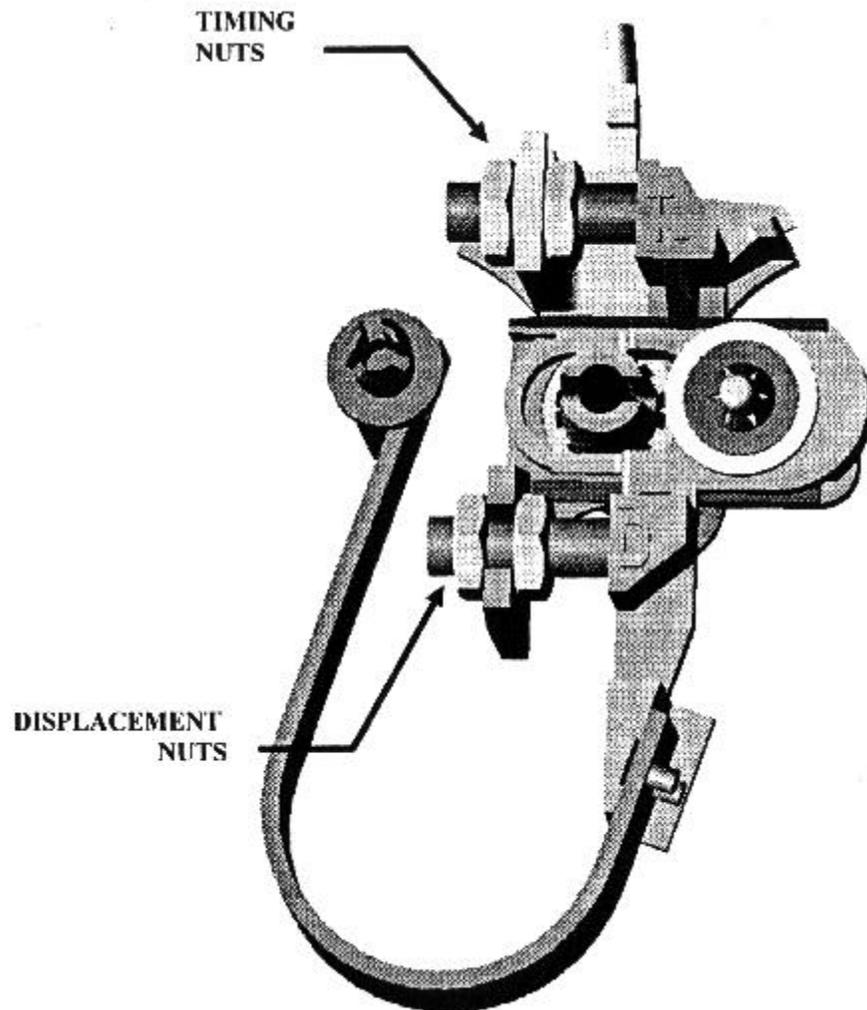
Adjustment mechanism on tangent crank assembly /
